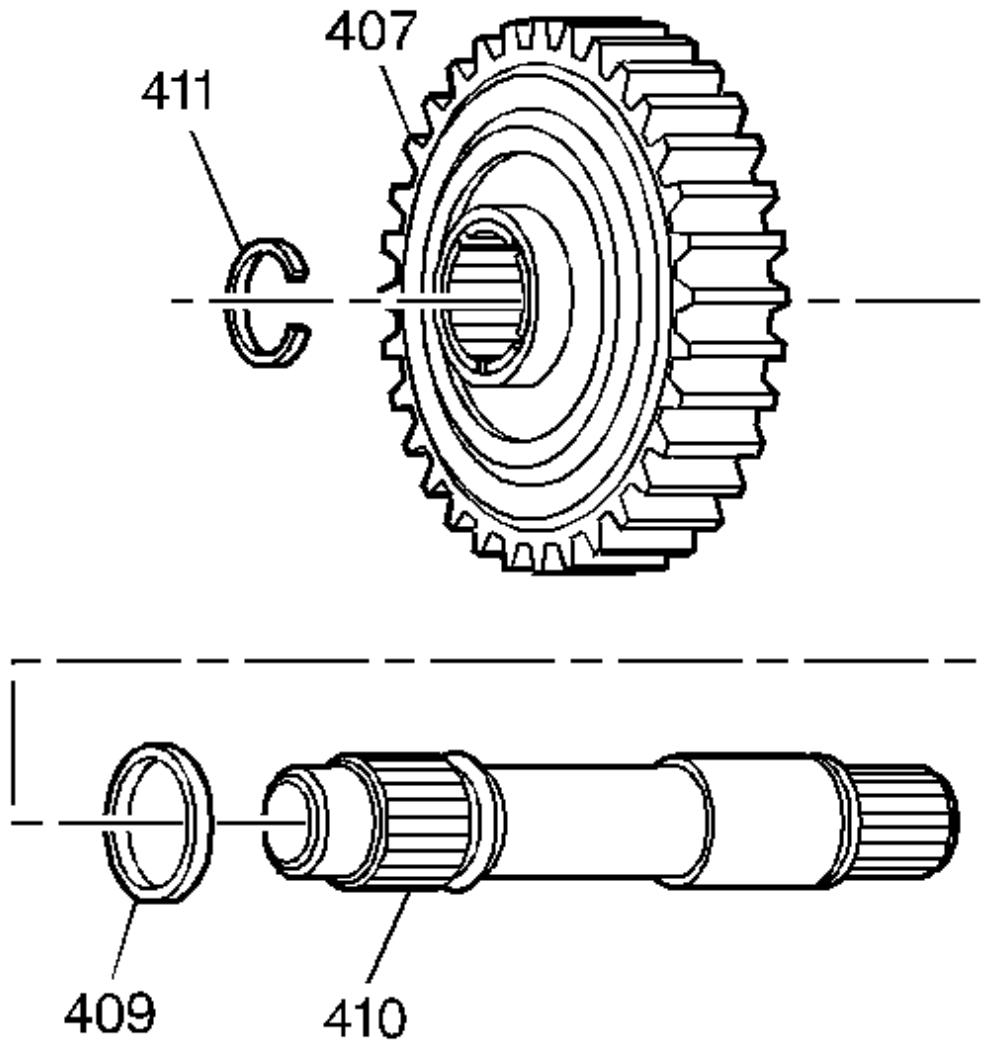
Locating Drive Sprocket, Turbine Shaft & Snap Ring
